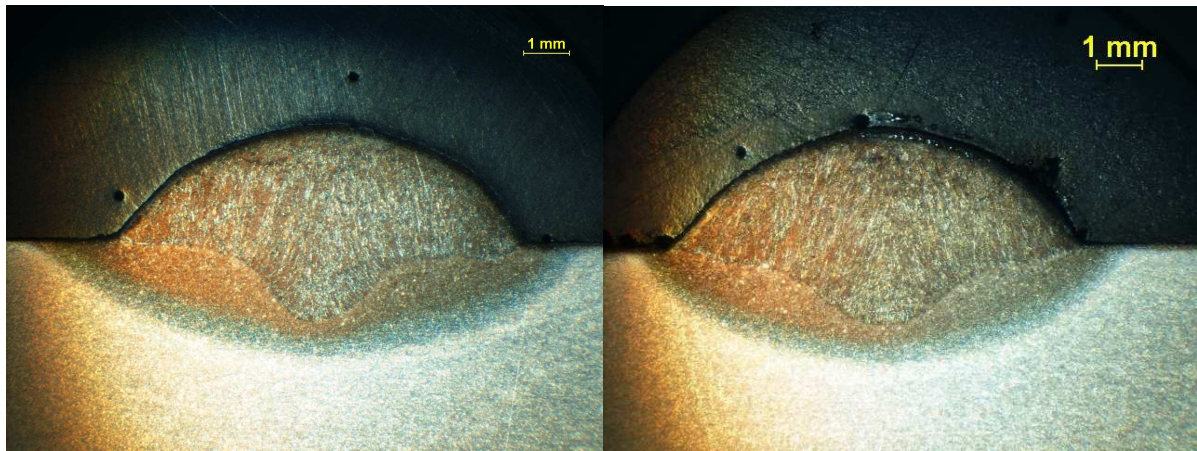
Macrostructure of weld using gas 99,996% Argon; left Pulsed transfer, right Dip transfer.
